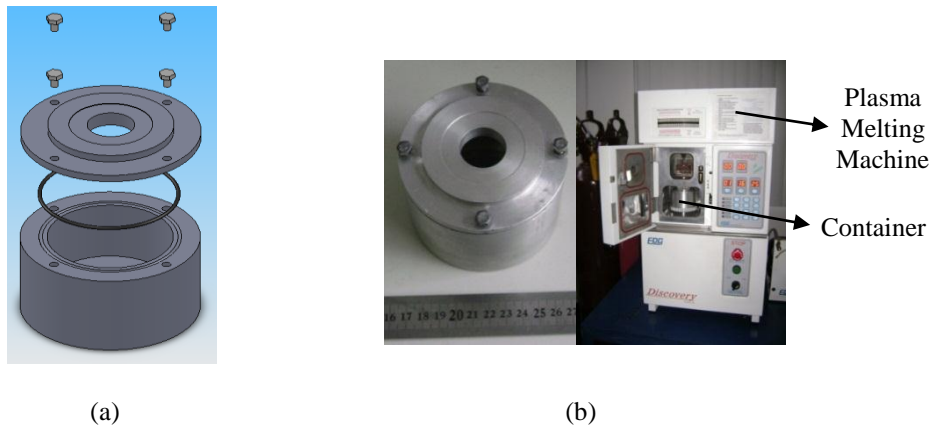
(a) Exploded view of the aluminum container, designed in SolidWorks. (b) Detail of the aluminum container and assembly in the plasma melting machine (Pereira *et al.*, 2010).
